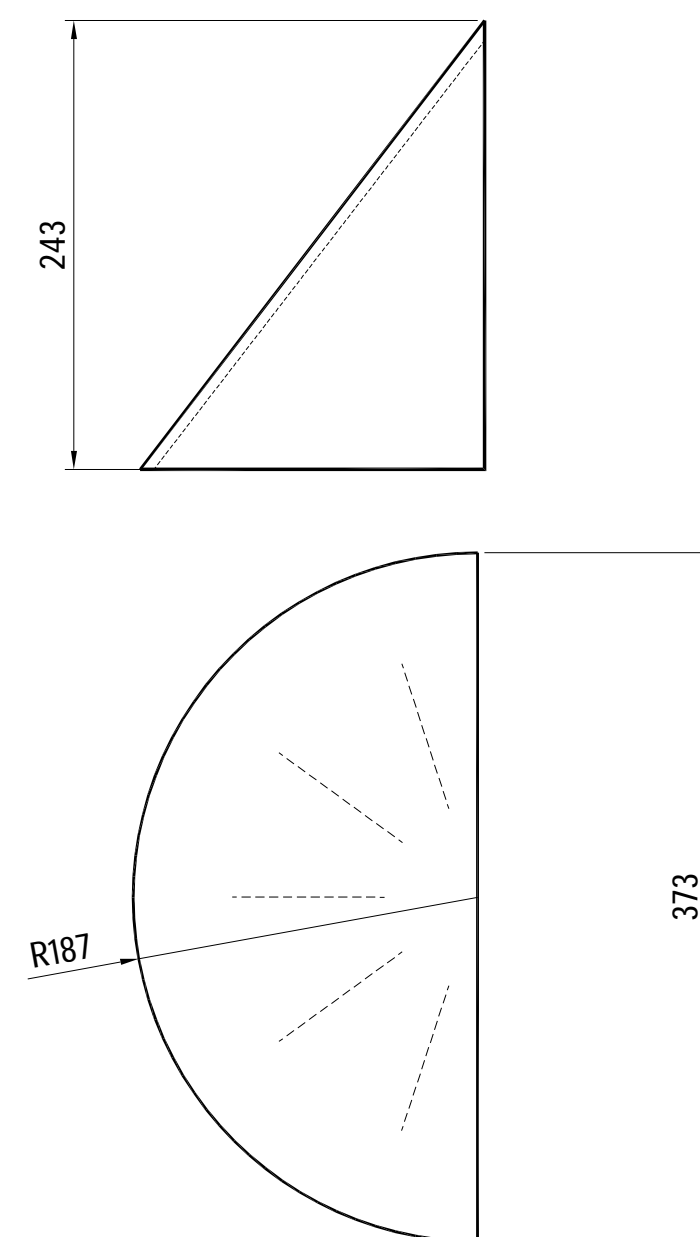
Form BAR (FOR MOULD FORM B1 ONLY)
